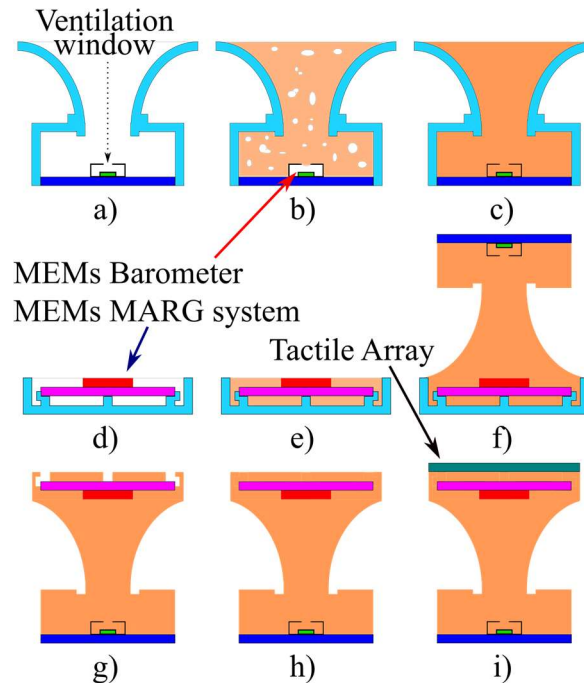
Fabrication process: a) The barometer PCB is connected to a 3D printed mold (light blue); b) polyurethane (shown in orange) is cast into the mold; c) structure after degassing; d) MARG system is placed on the 3D printed mold; e) polyurethane is cast around MARG system; f) the barometer and the compliant structure are connected to the MARG system; g, h) the 3D printed mold is removed and positioning gaps are filled; i) tactile array added to the module.
